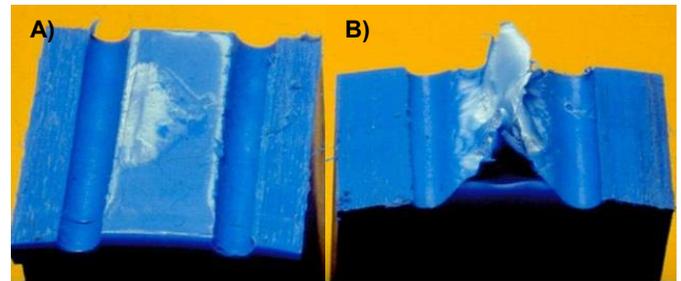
EXAMPLE OF: A) BRITTLE FAILURE AND B) DUCTILE FAILURE IN A TENSILE TEST WITH A WAISTED SPECIMEN GEOMETRY
